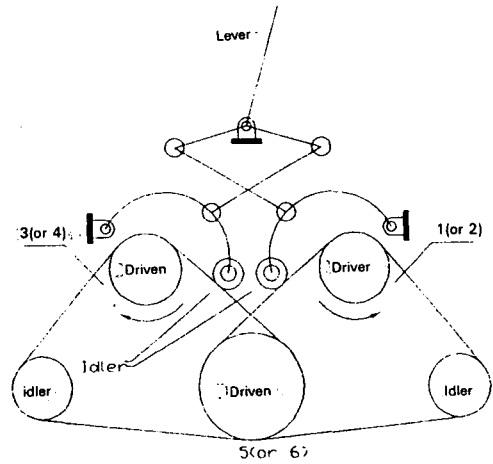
Schematic diagram of triangular type belt clutch mechanism.
